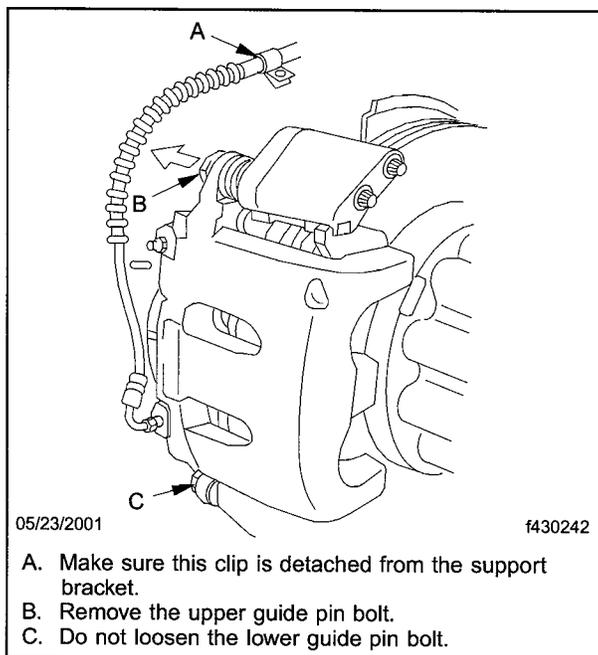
, Upper Guide Pin Mounting Bolt Removal
